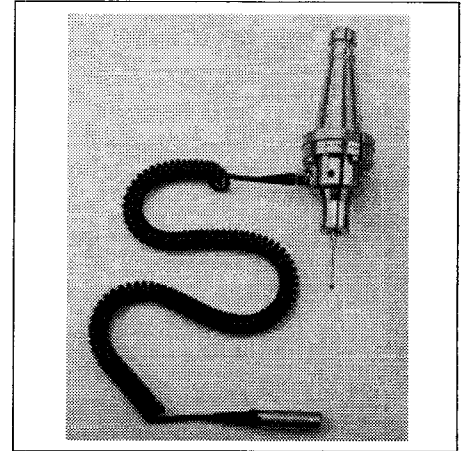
HEIDENHAIN TS 220 3D-touch probe
